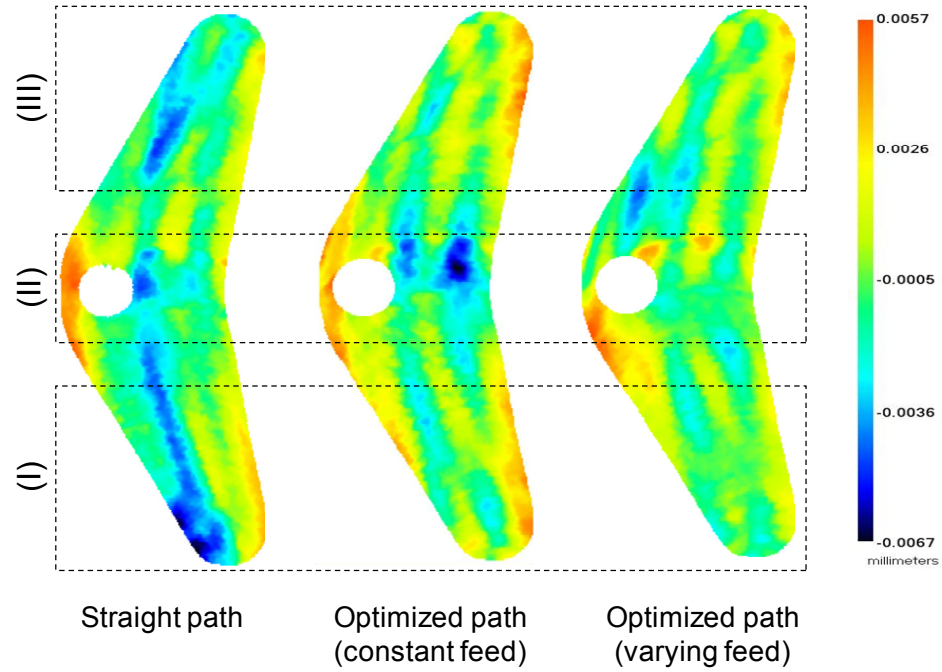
Machined surface of optimized cutter path with varying feed rate
